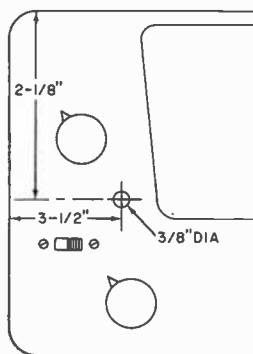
Before drilling R3/R4 mounting hole, check for adequate behind-panel clearance.
